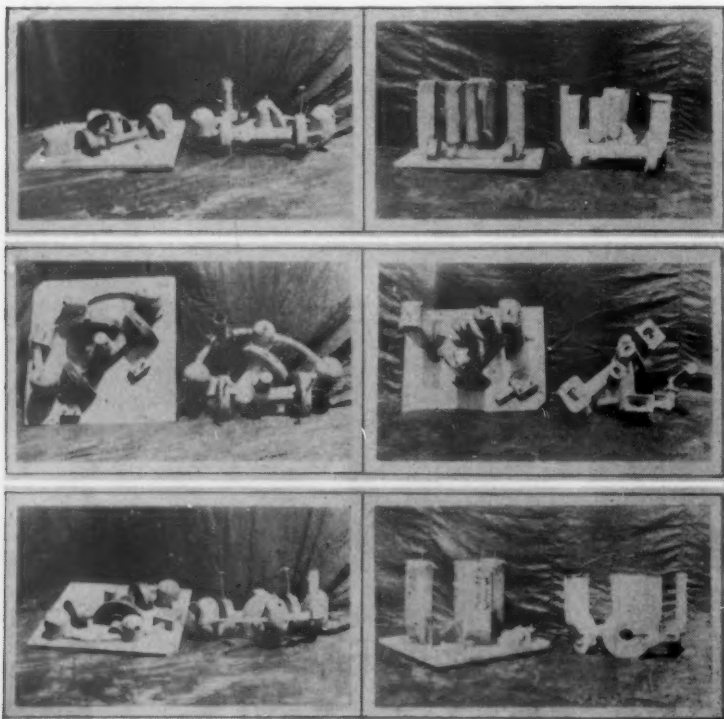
A COMMERCIAL VALVE CASTING MADE BY BOTH THE OPEN AND BLIND RISER METHODS.
